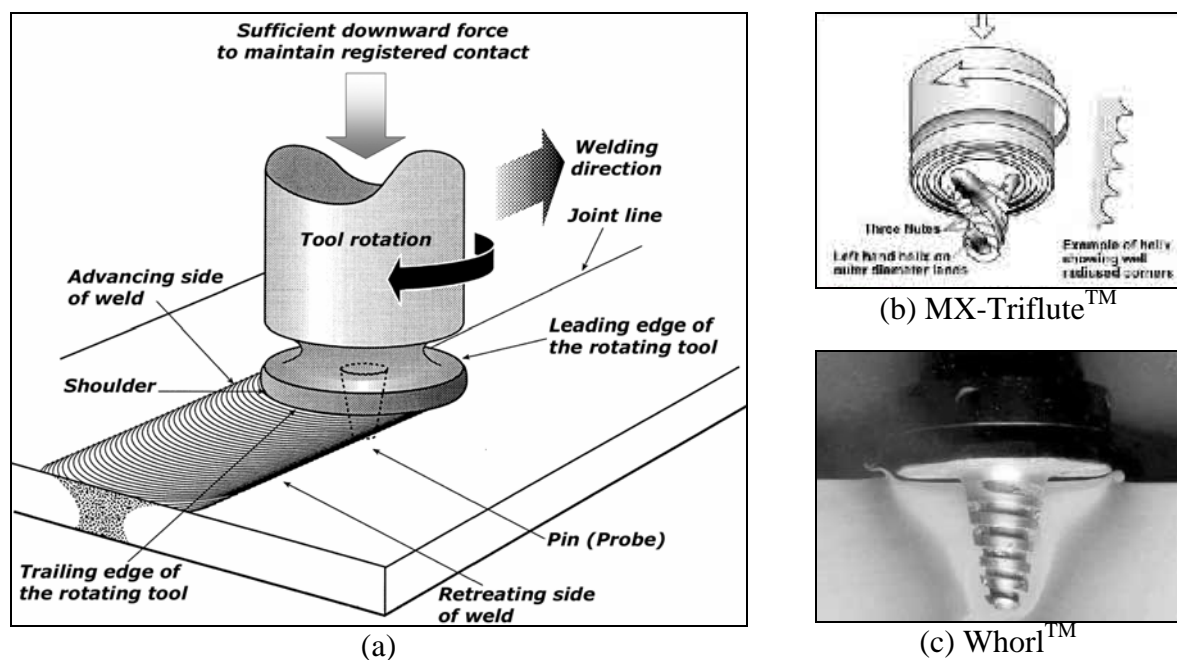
Schematic diagram for FSW process and tool designs [2, 3]
